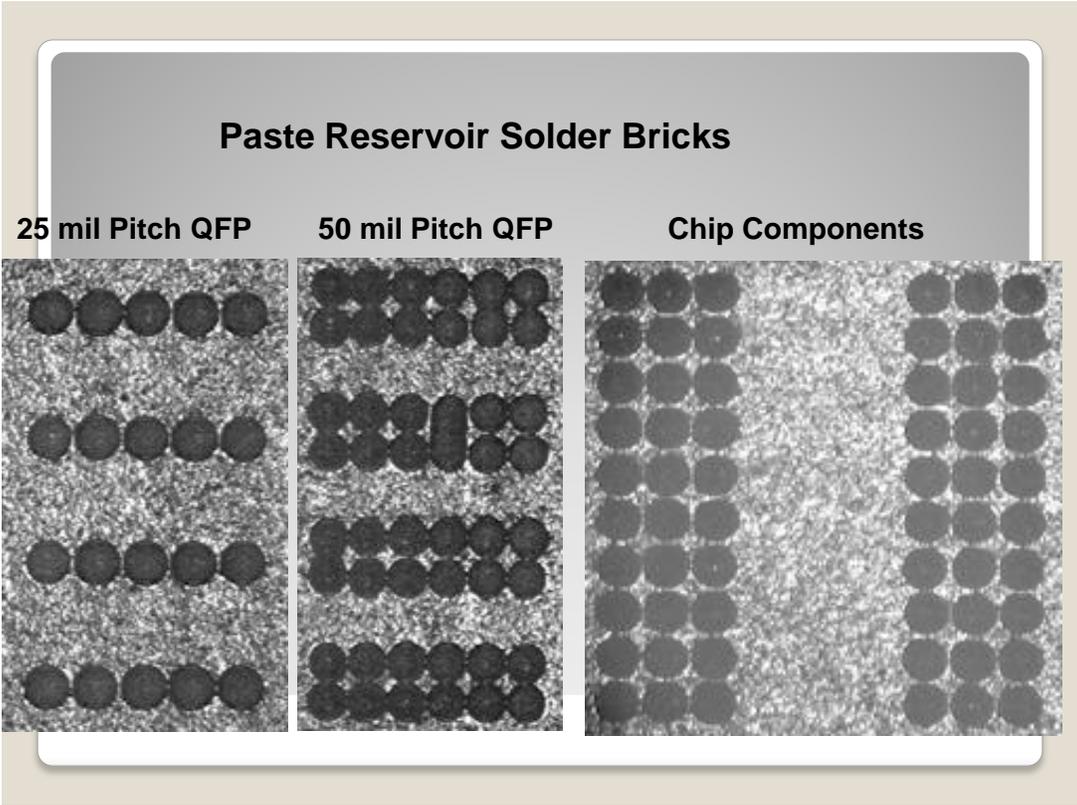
Solder Bricks using circular apertures for pitch parts and chip components
